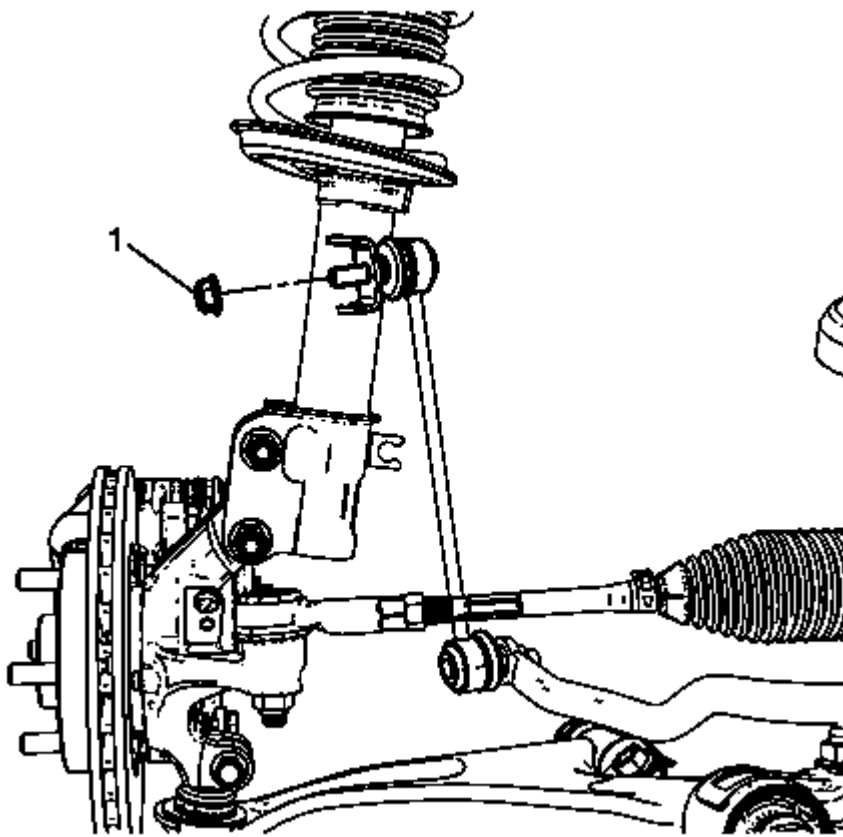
Stabilizer Shaft Link And Strut Retaining Nut
